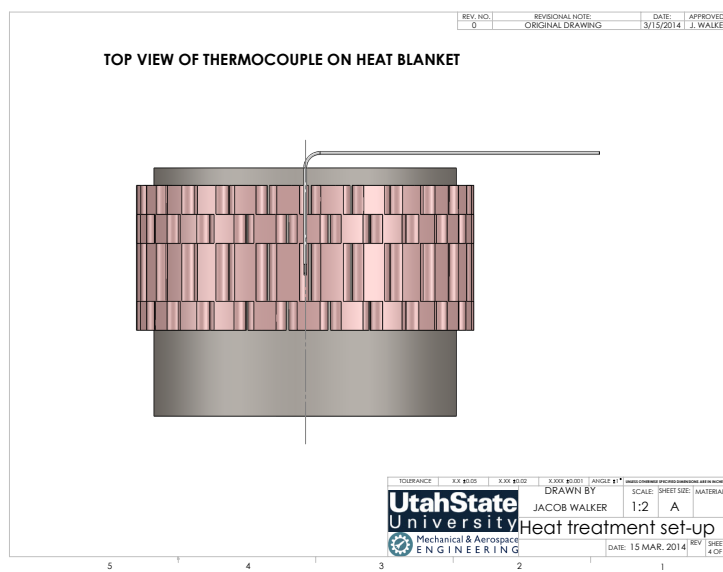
Drawings of Heat-Treatment Set-Up; Page 4
